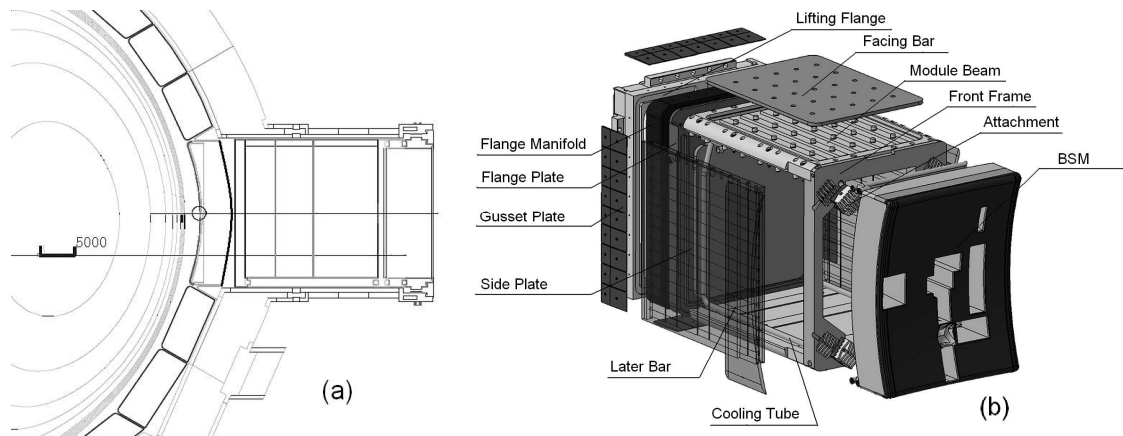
(a) location of port plug in VV port (b) exploded 3-D port plug model
